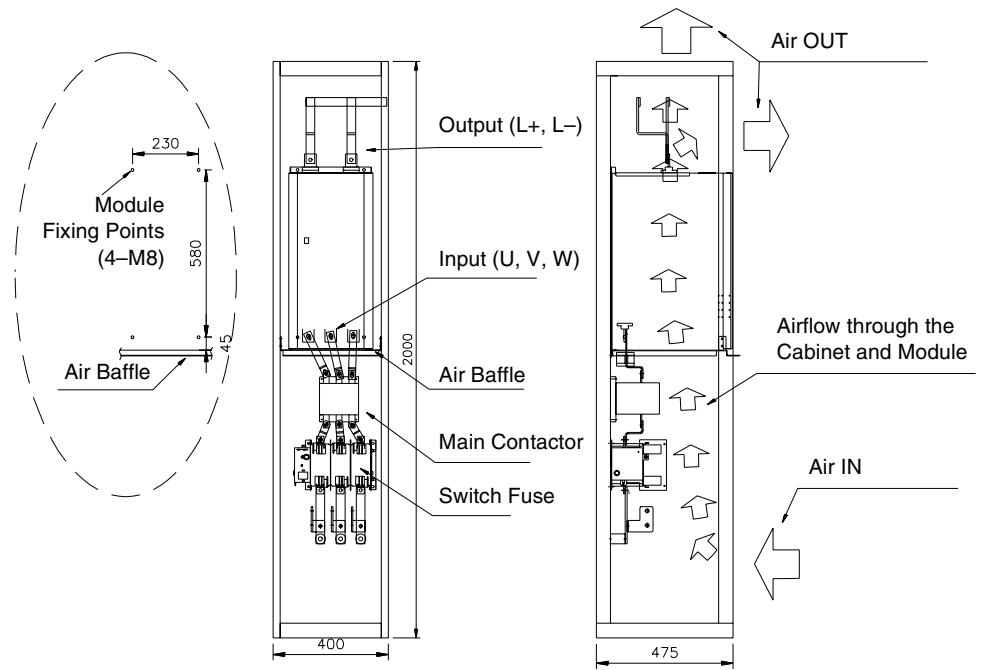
Cabinet layout example for Frame B2 supply unit.
